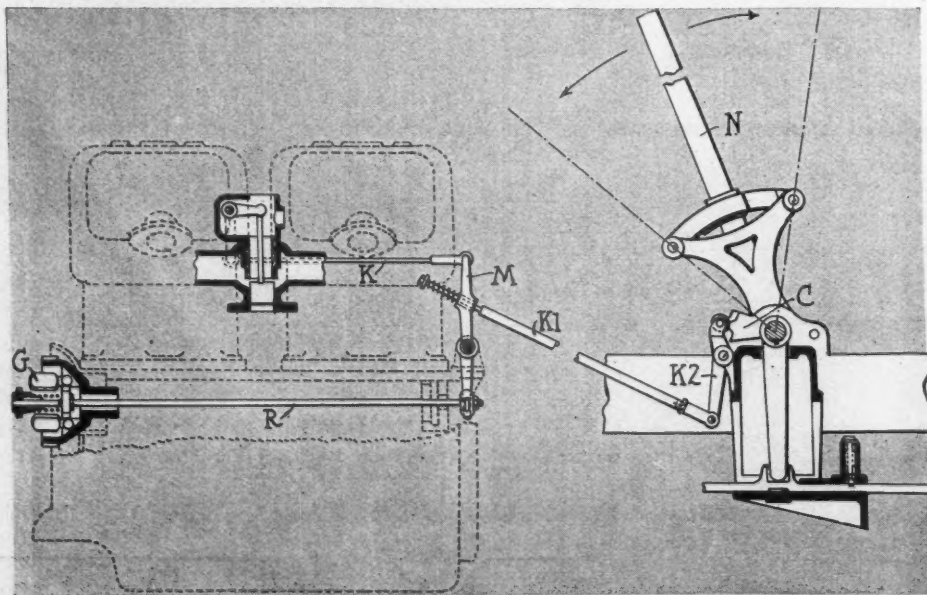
GOVERNOR AND GEARSET CONTROL ON CARBURETER
